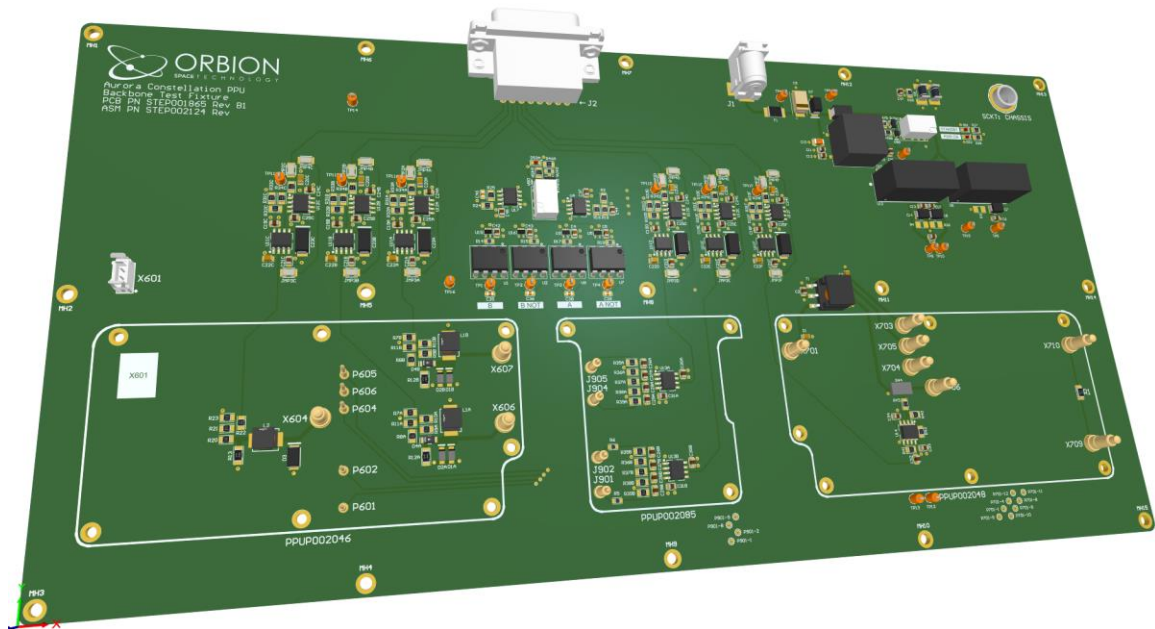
Backbone Test Fixture PCBA 3D model.
